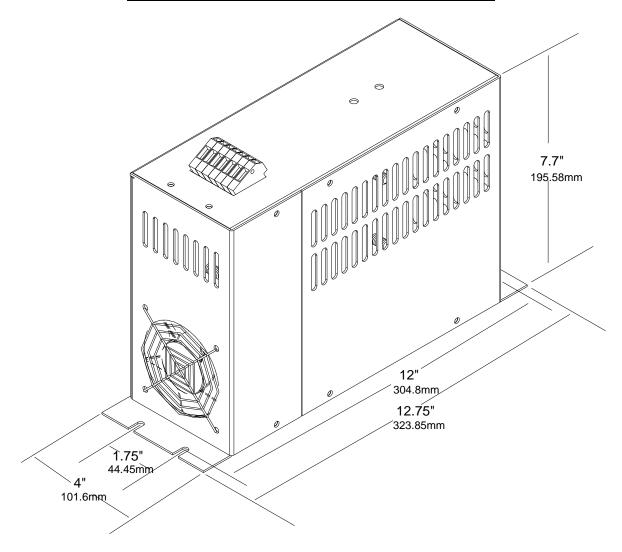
M4 Chassis Dimensional Outline Drawing
